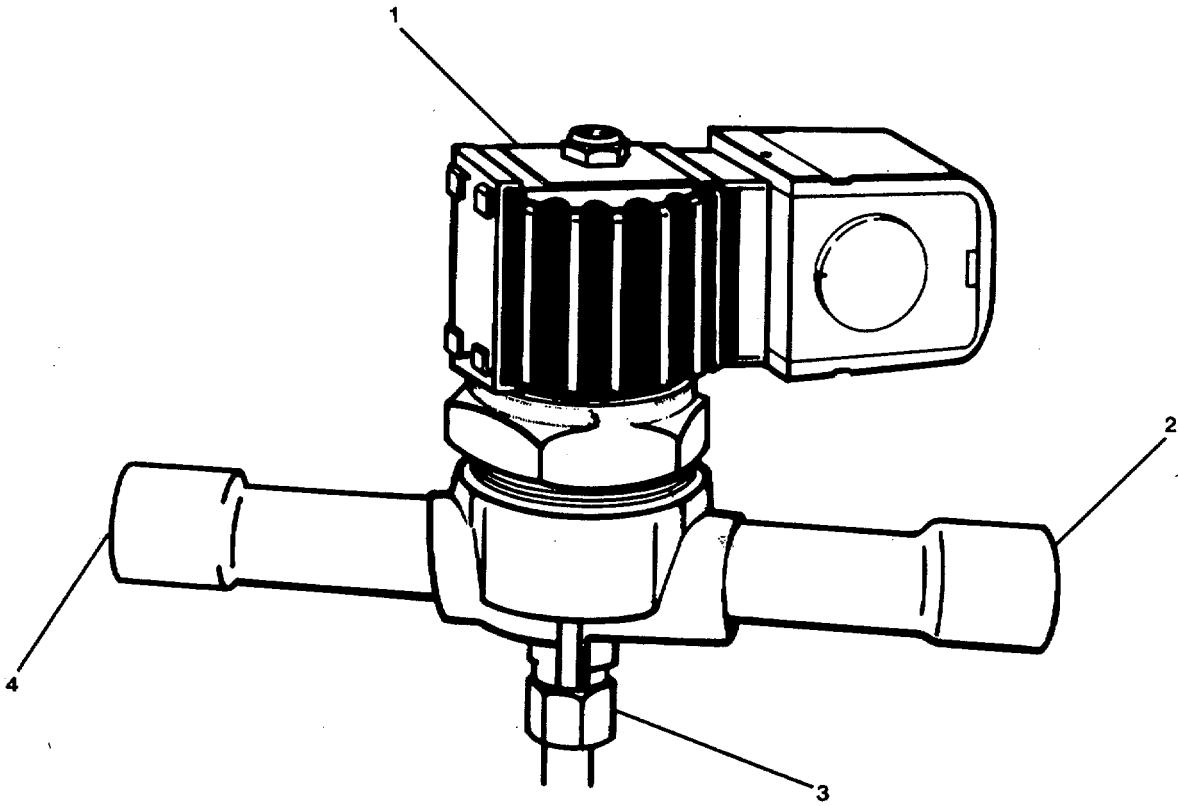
Liquid Line Valve (High Pressure Solenoid).
